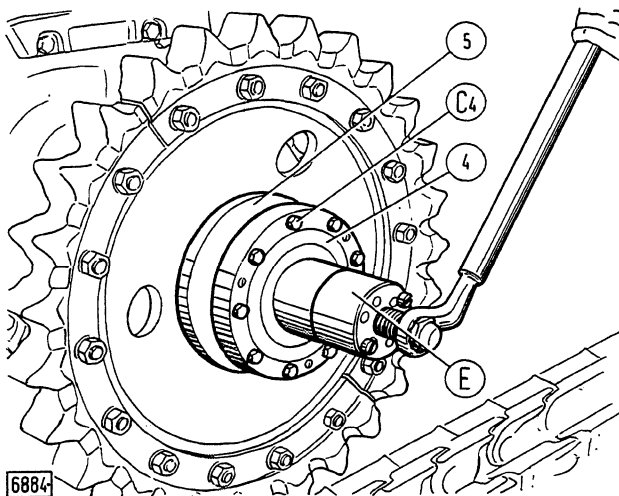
Withdrawal of rear suspension shaft inner bearing (4) together with bearing cage (5)
